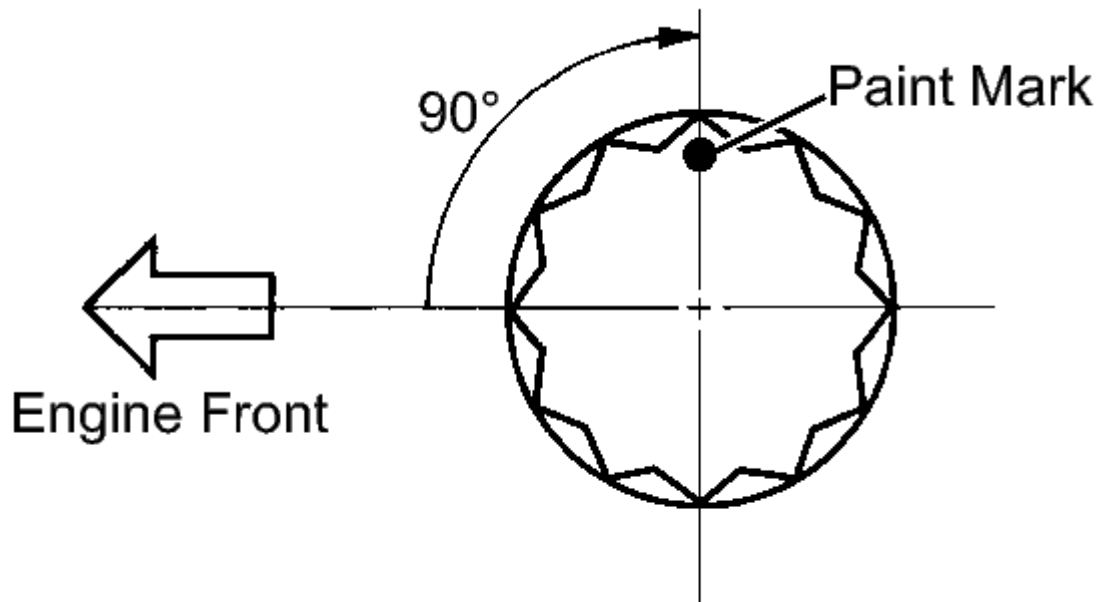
Retightening Bearing Cap Bolt By 90 Degrees
